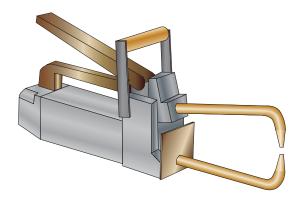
Small welder for fine, detailed work.
